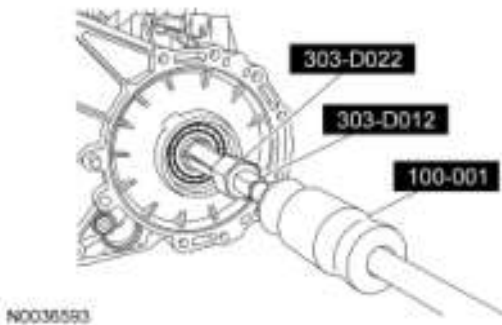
Removing Roller Bearing Using Special Tools (100-001, 303-D012, 303-D022)
